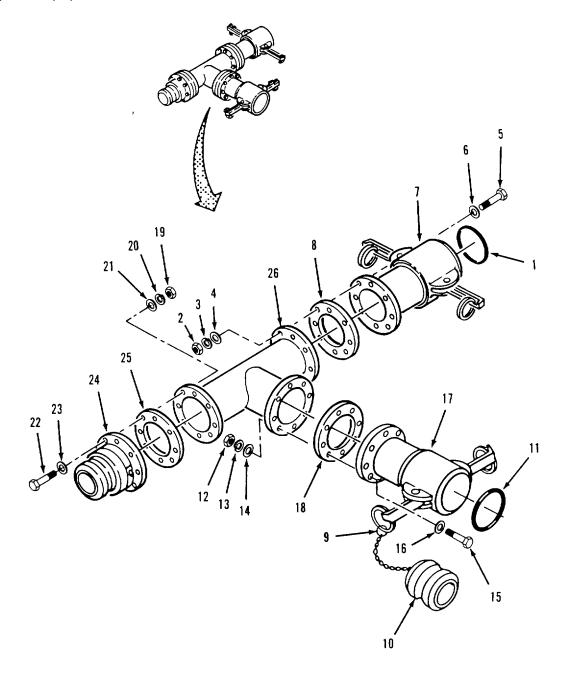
Tee Assembly (9112-Y3) Disassembly
